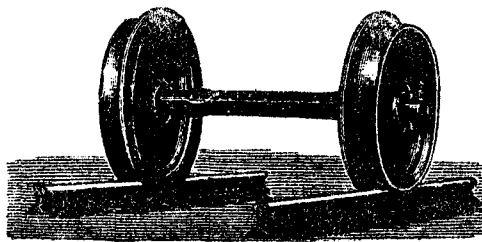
Set of Wheels, with one flange and  $\square$  axle, with bolt holes for fastening to truck. Both wheels loose.
